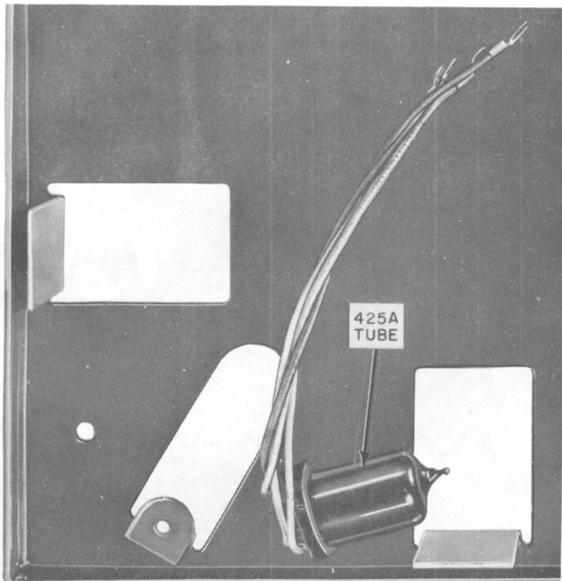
Installation of Cold-Cathode Tube on Base Pan Assembly
